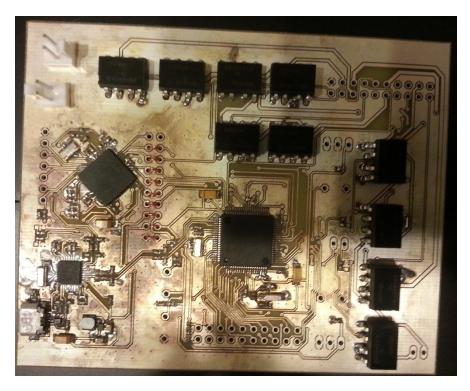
PCB assembled by QMS. Contains the microcontroller and Optoisolator for firing.
